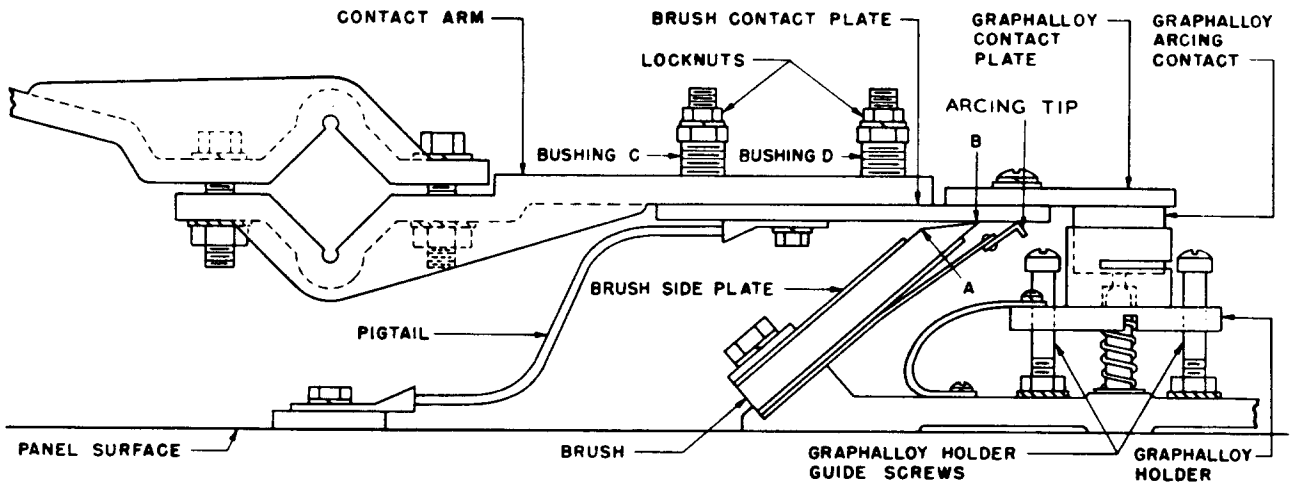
Contact Adjustment for Laminated-Type Contacts and Graphalloy Arcing Contacts — Bulletin 905, 907, and 908 Switches
